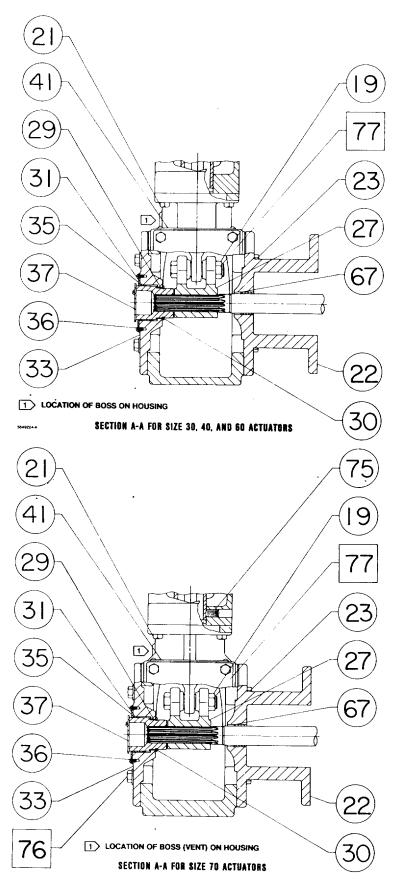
Typical Type 1052 Actuator Assembly (Continued)
